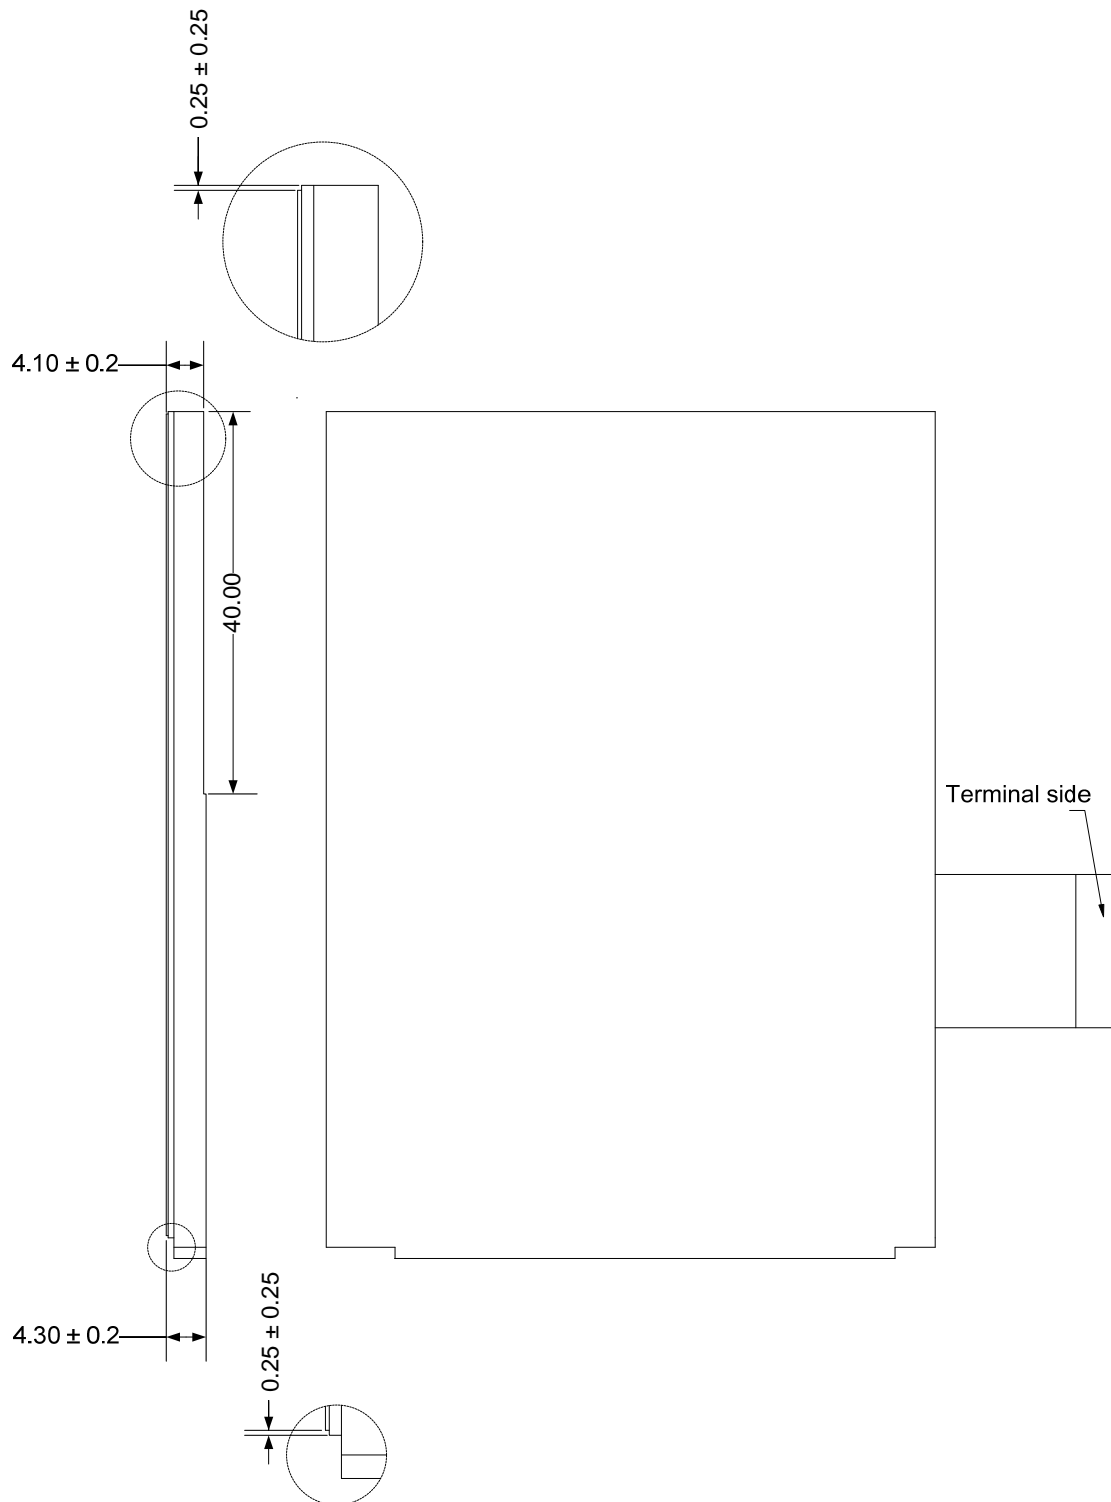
3.7- inch Mechanical Outline (Back View)
